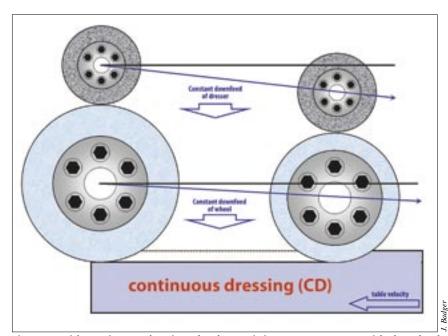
With continuous dressing, the dresser is in constant contact with the wheel while it is grinding and the wheelhead is continuously feeding down into the workpiece.
